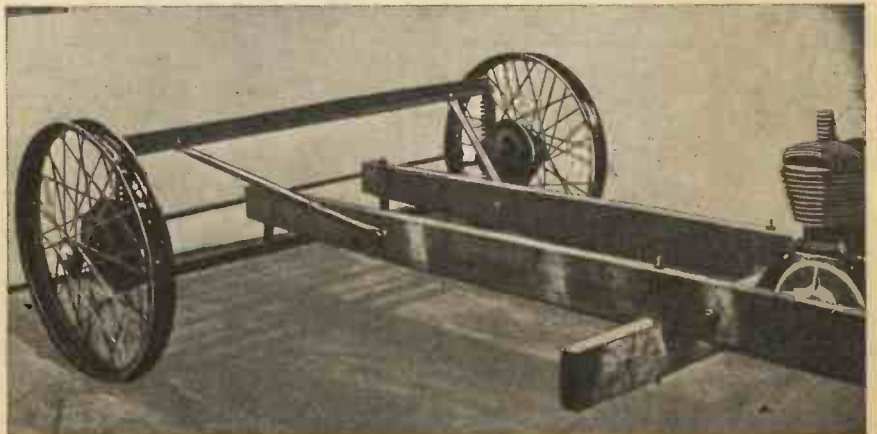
The tie rods securing upper member of front axle to the main chassis members.
